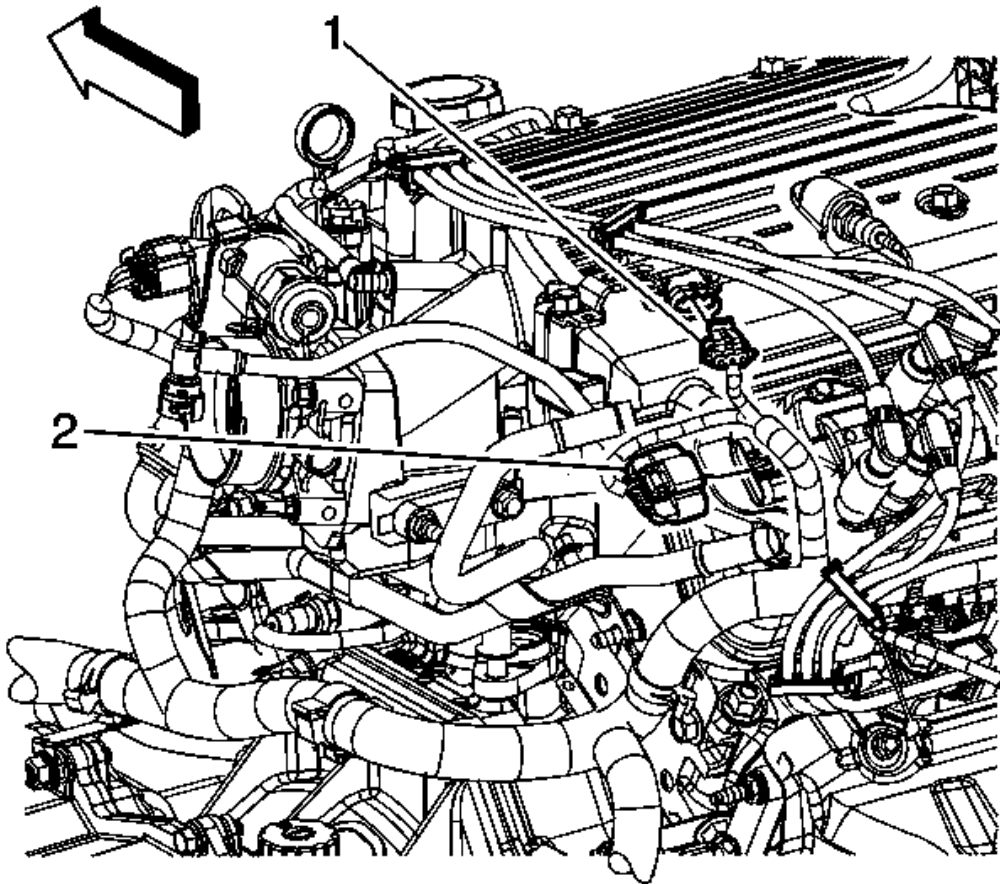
Identifying Engine Wiring Harness Electrical Connector
